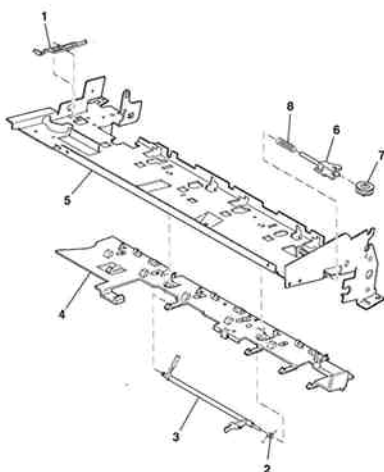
CARRIAGE GUIDE & PRESSUER PLATE
